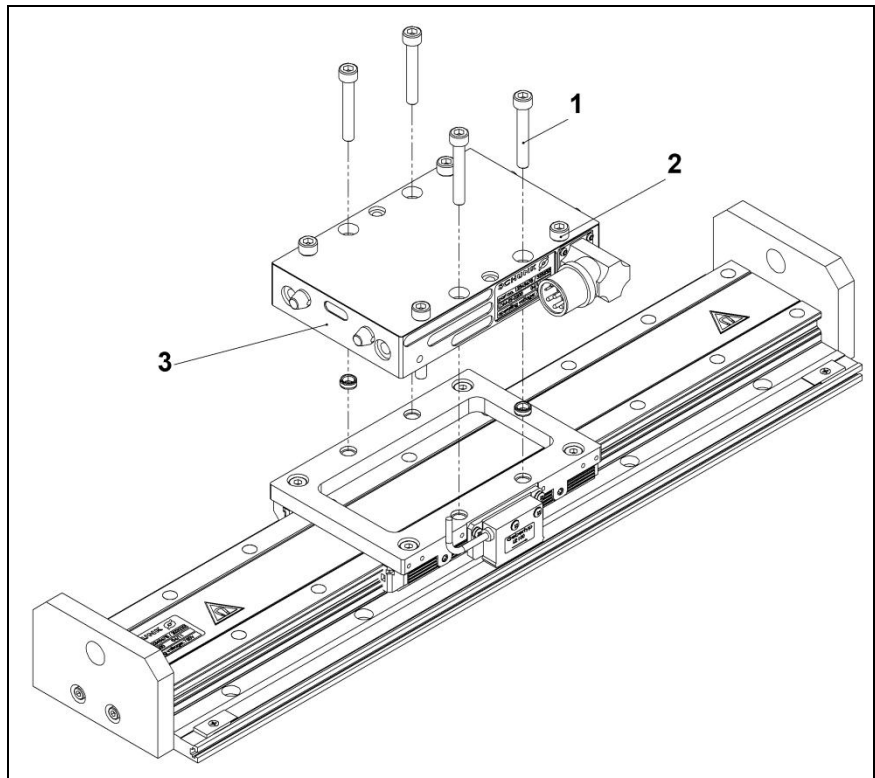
Changing the motor housing of a linear motor drive type LDF
